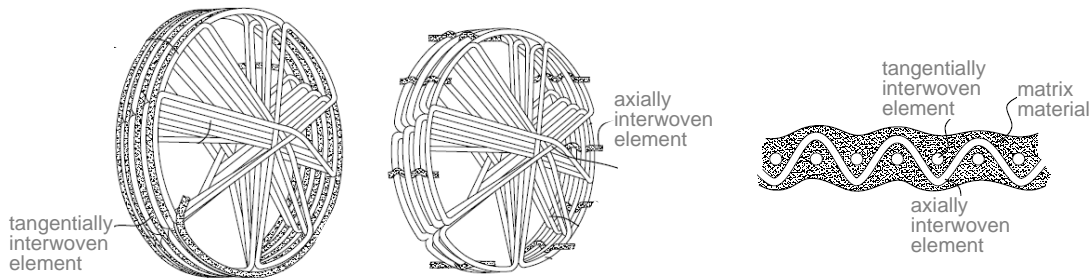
Interweaving of Inductive and/or Magnetic Motor and Bearing Elements
